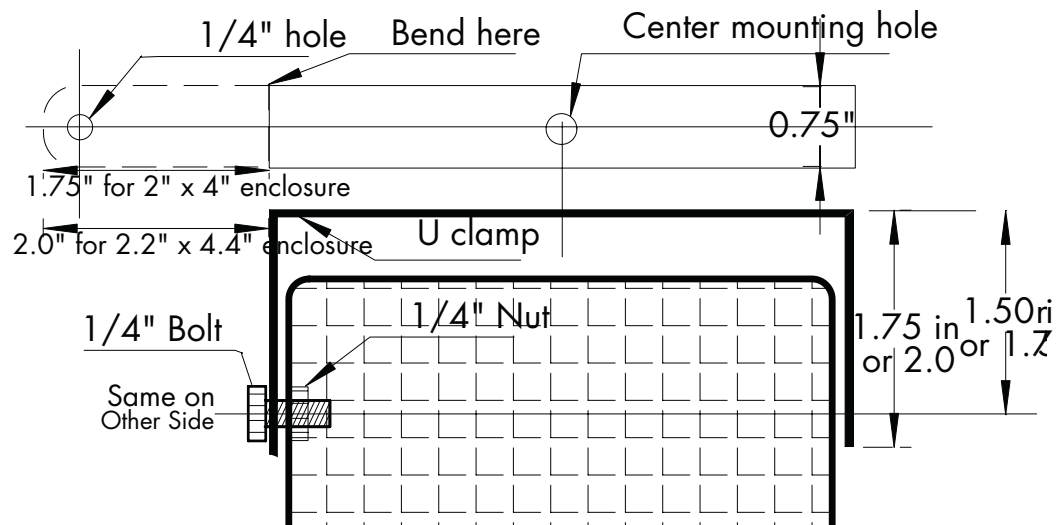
This drawing illustrates the size and shape of the optional U bracket handle and how it connects to the enclosure. Where you see two measurements for a single dimension, the smaller applies to the Standard Garage Sentry, while the larger applies to the deluxe version.
